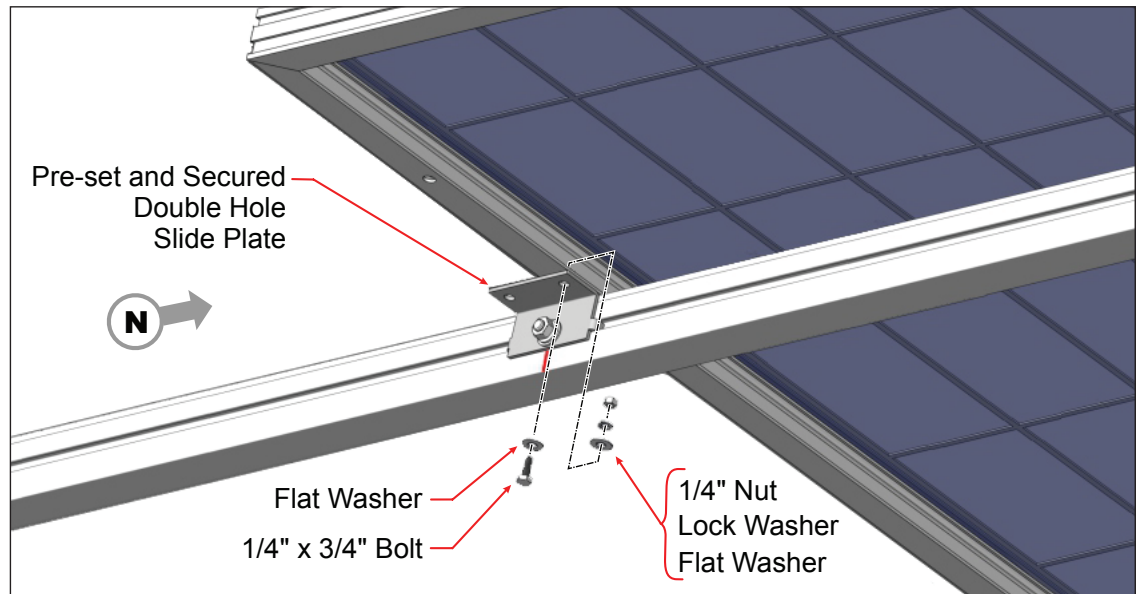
Installing first row of PV Modules to the Double Hole Slide Plates
